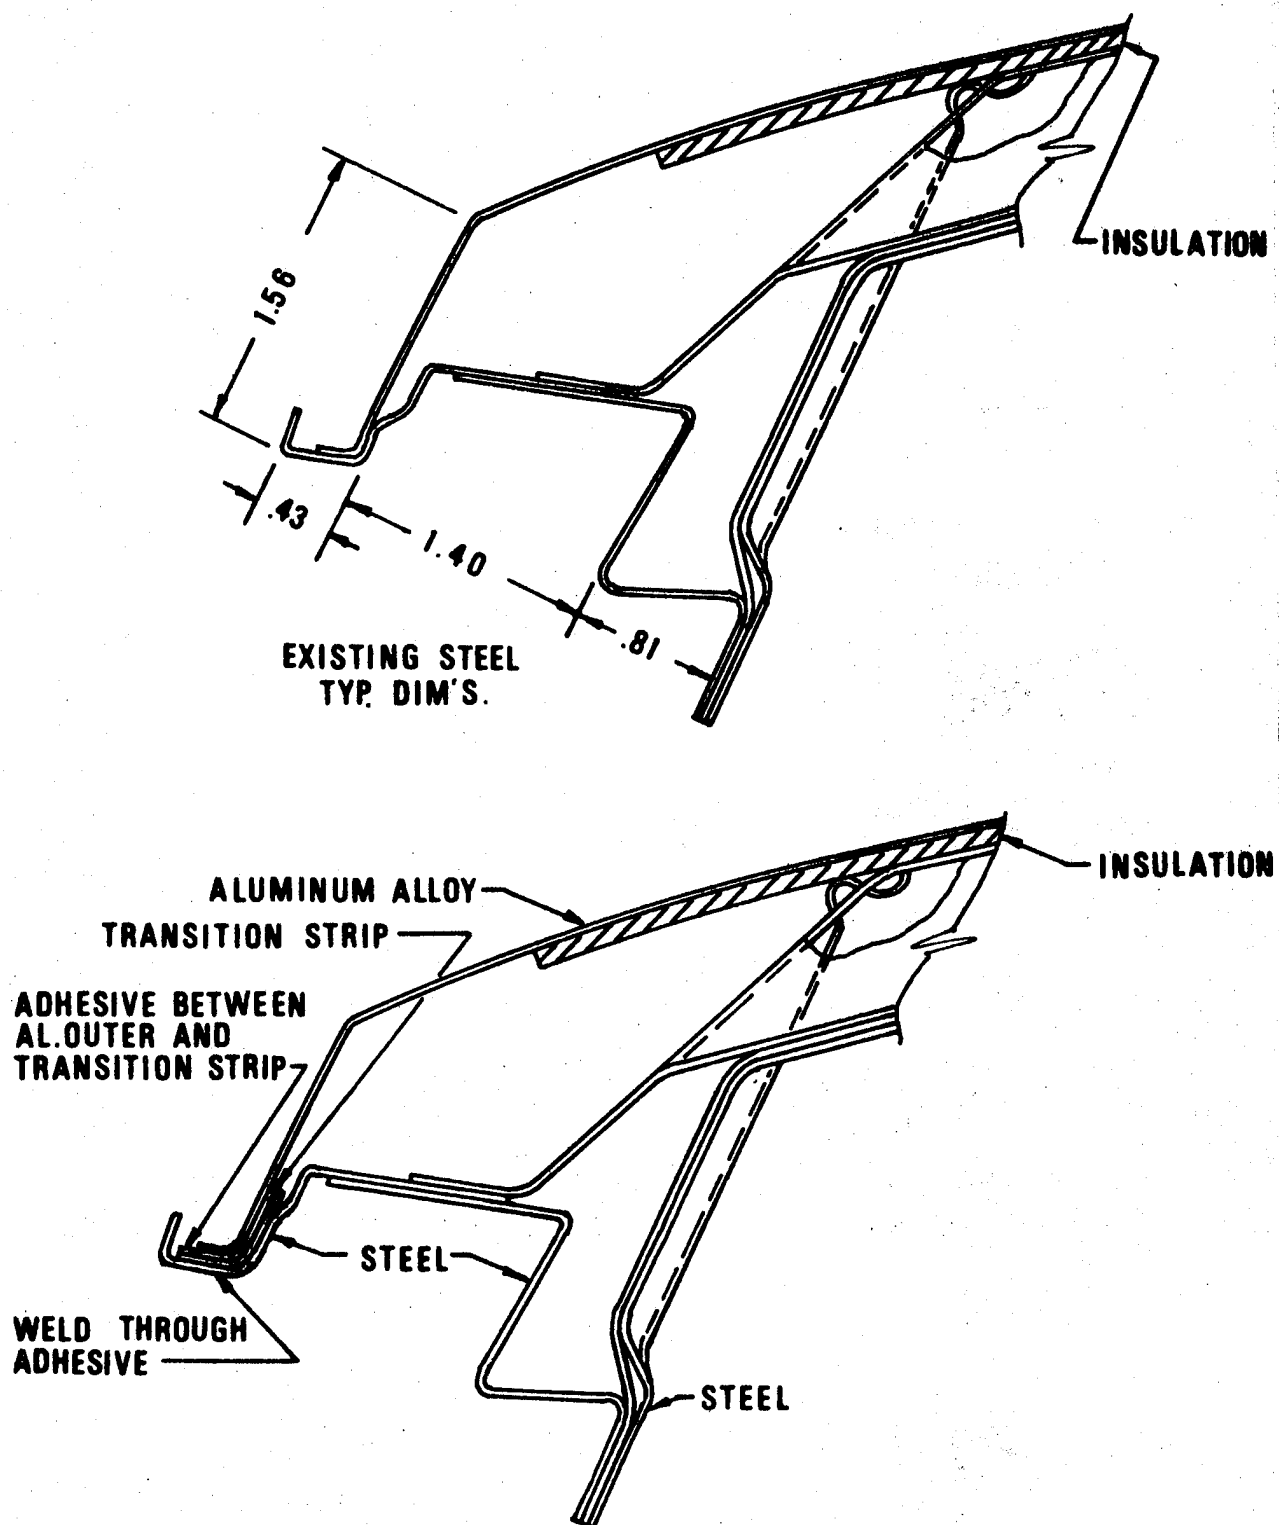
ROOF TO REINFORCEMENT JOINT, LEFT AND RIGHT SIDES
